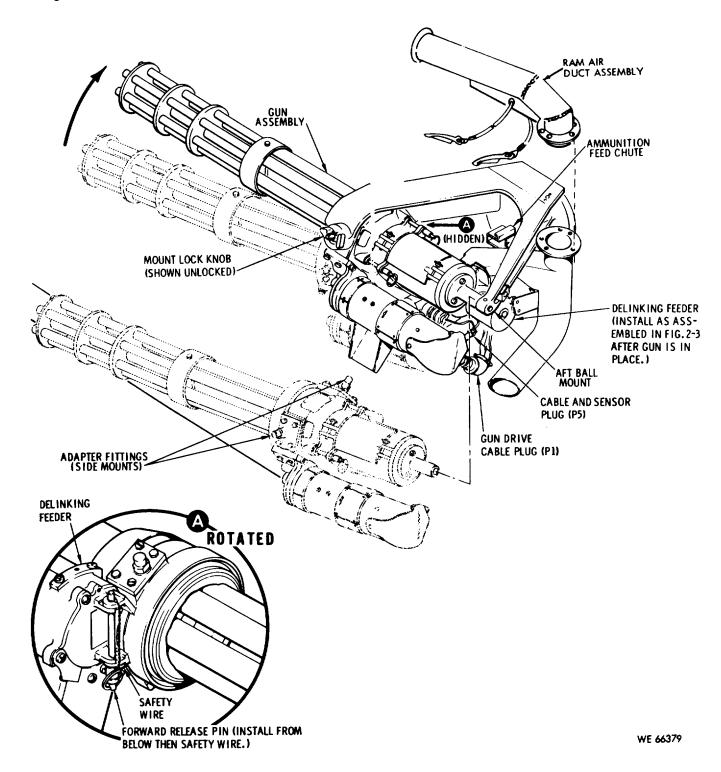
(Superseded) Installation/Removal of gun assembly and ram air duct assembly.
